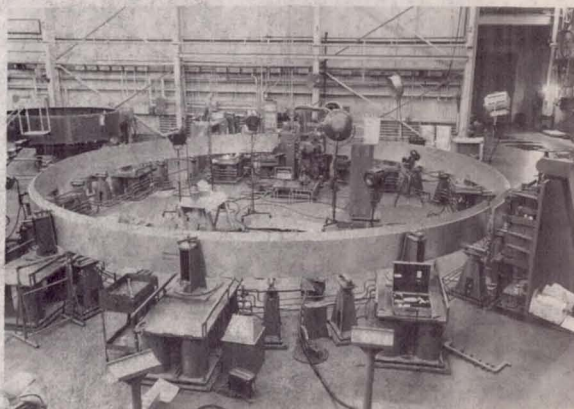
Saturn booster aluminum ring. Electron-beam welding. (Marshall Space Flight Center.)
